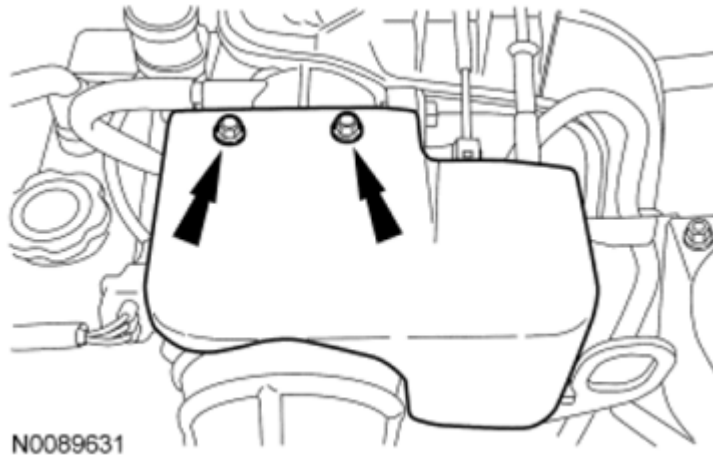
Locating Throttle Body (TB) Shield Bolts
